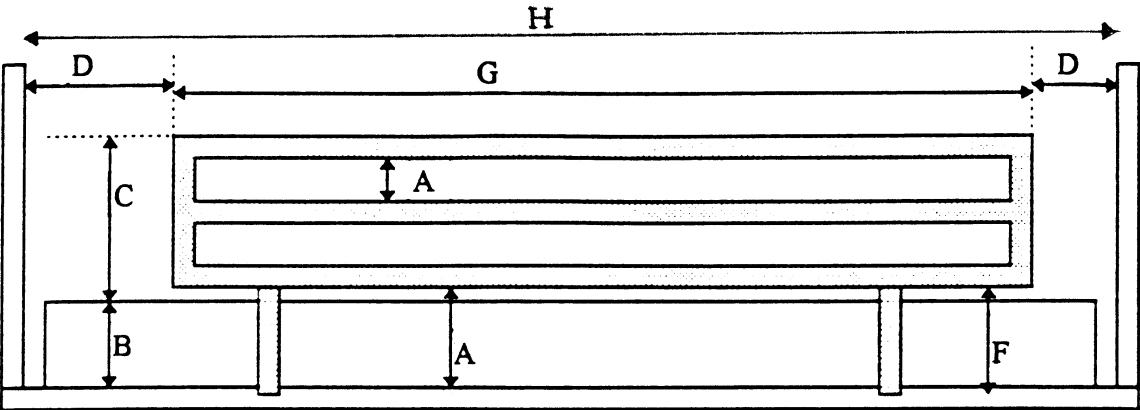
Dimensions of single piece side rails (example, schematic presentation only)
